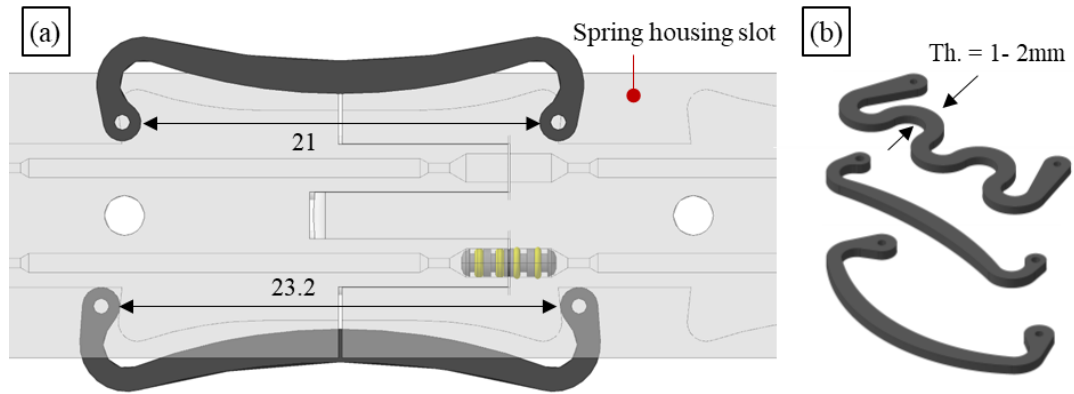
Design of the spring. (a) Detail of the spring assembled between two modules and (d) different spring designs. In (a), only one spring is extended and inserted in the spring housing slot.
